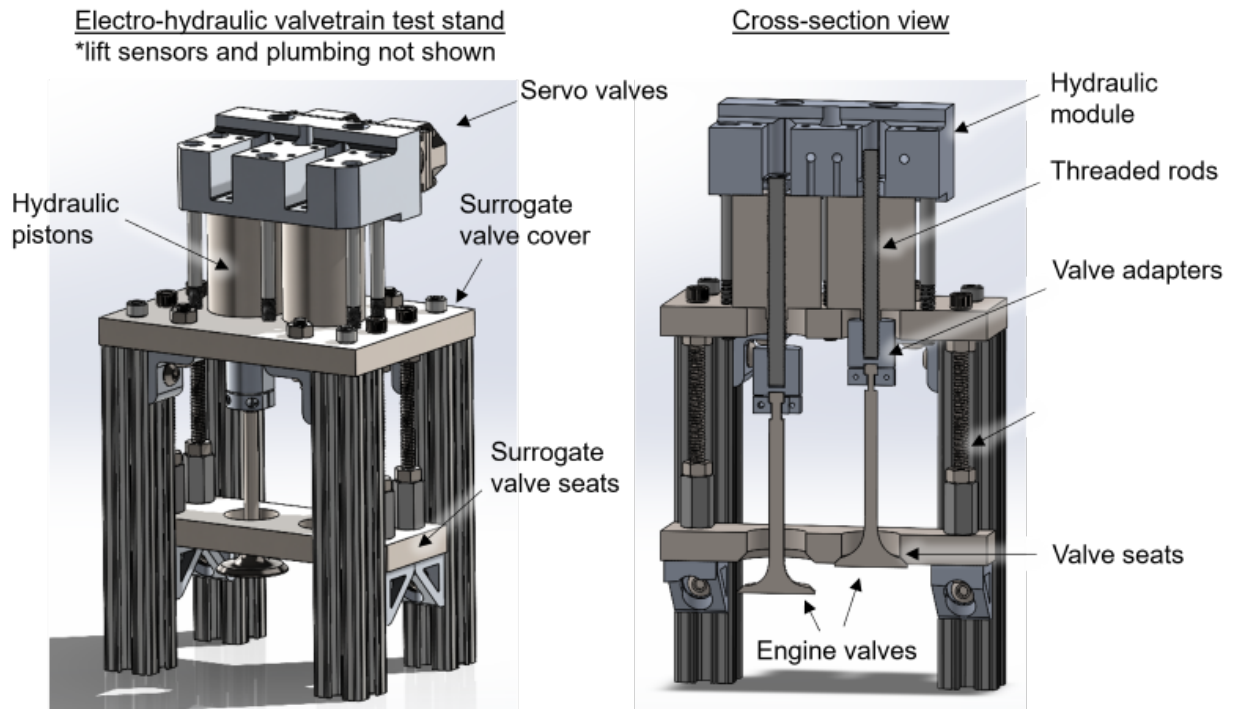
CAD rendering of electro-hydraulic valvetrain test stand.
